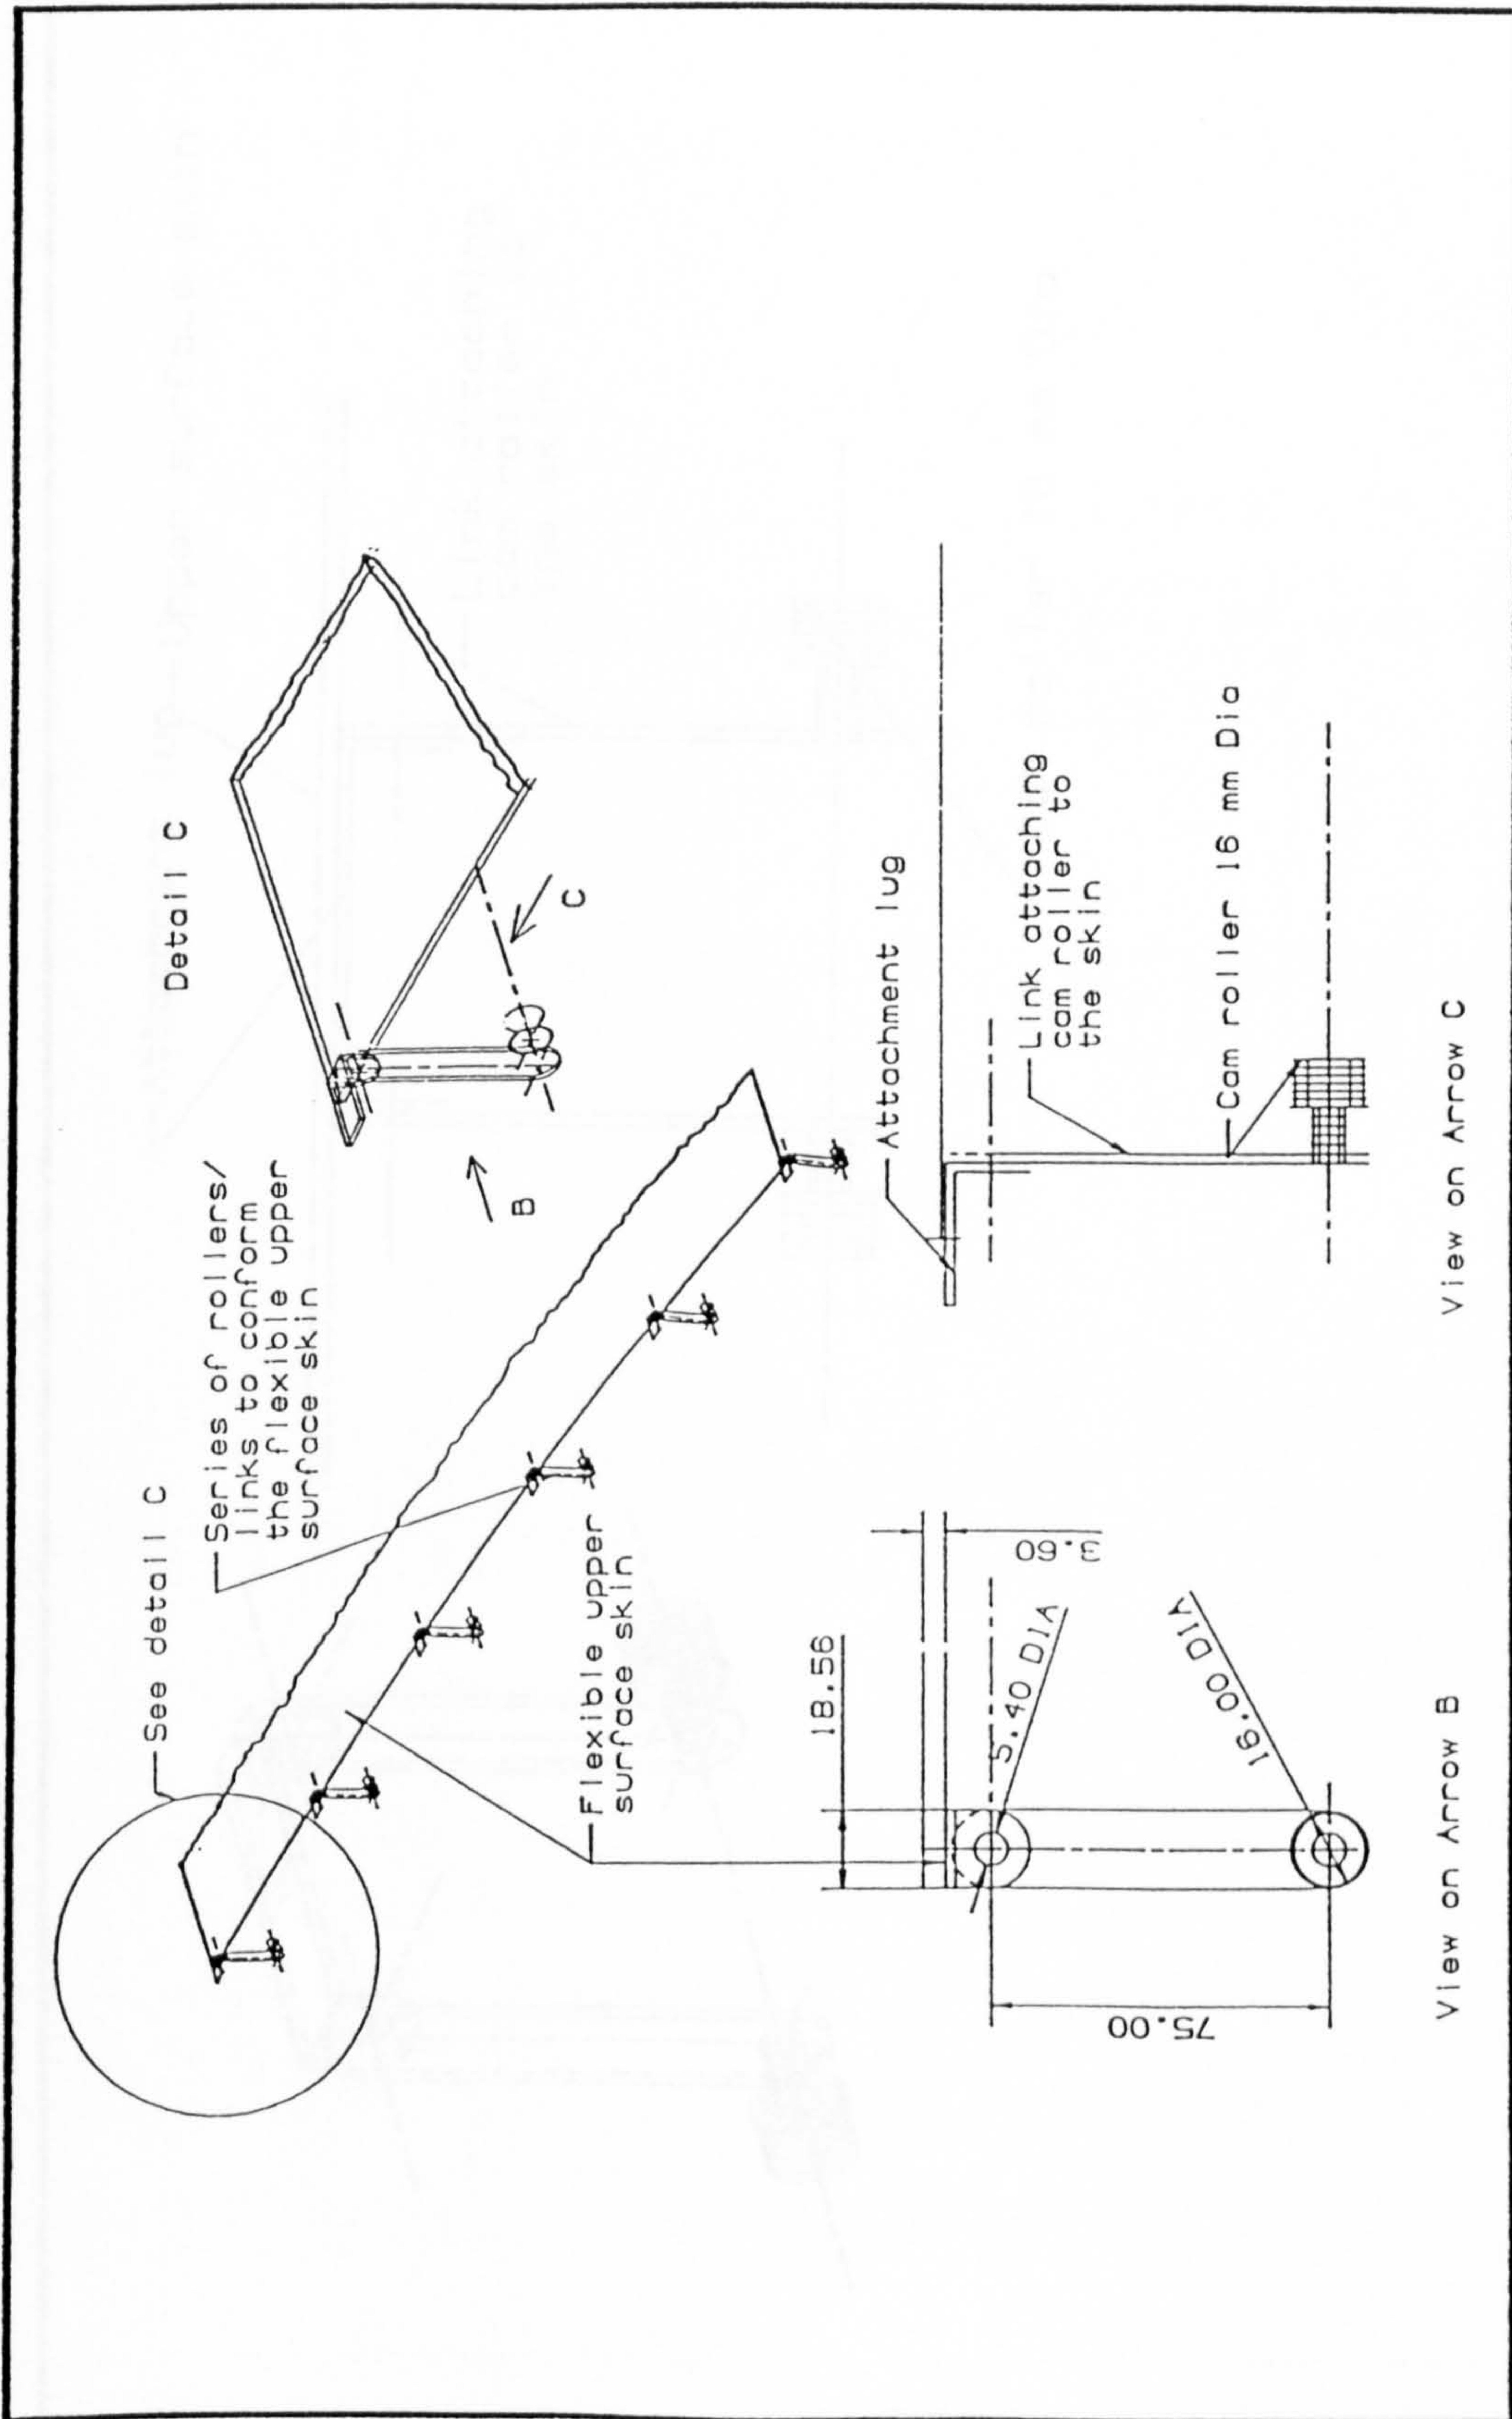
Details of the outboard roller link arrangement to conform the upper surface skin
